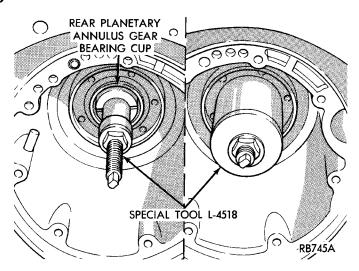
Remove Rear Planetary Annulus Gear Bearing Cup
